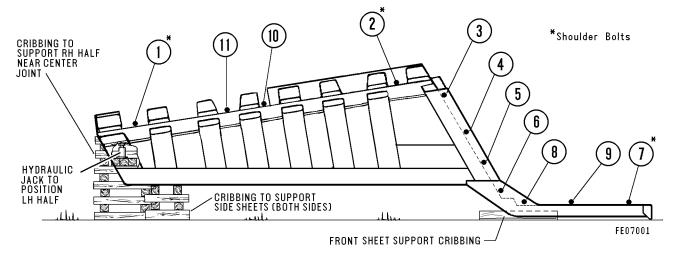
BODY ASSEMBLY HARDWARE INSTALLATION SEQUENCE
